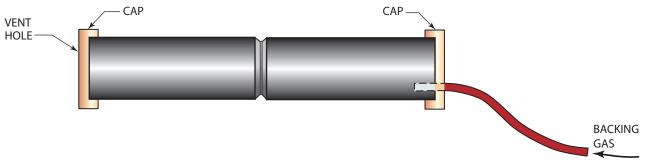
Backing gas can be fed into a pipe for welding by capping the ends externally.
